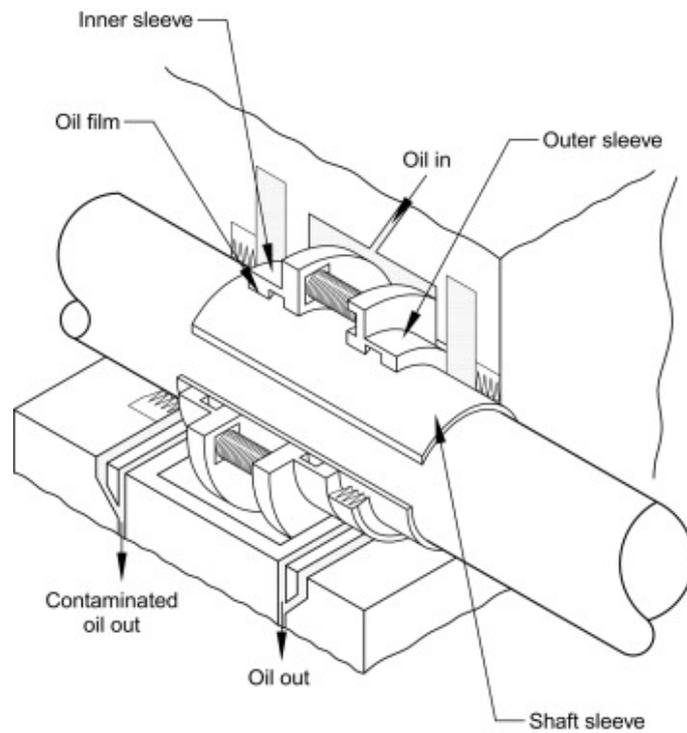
Three-dimensional view illustrating a liquid film assembly.
